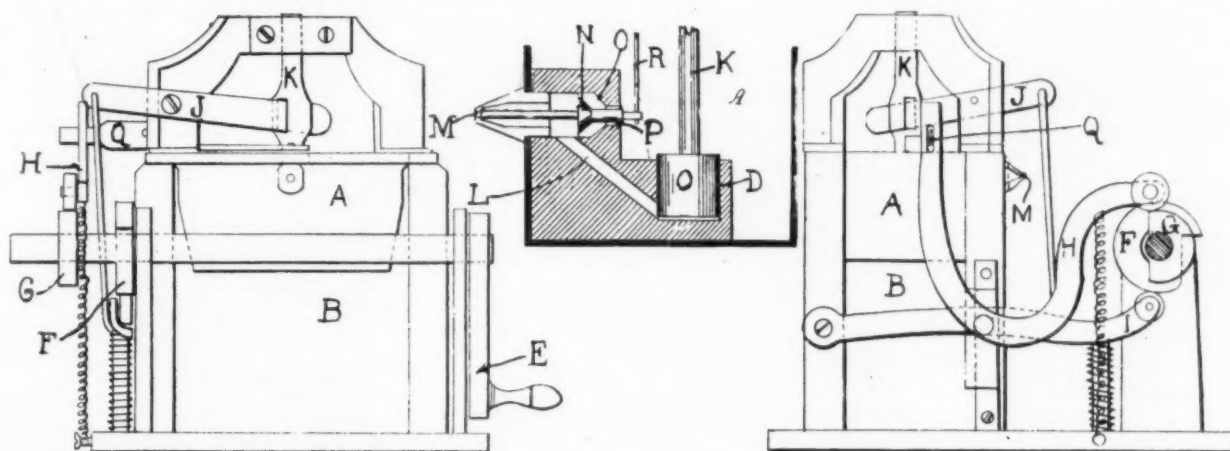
TYPE-CASTING MACHINE PATENTED IN 1849.
